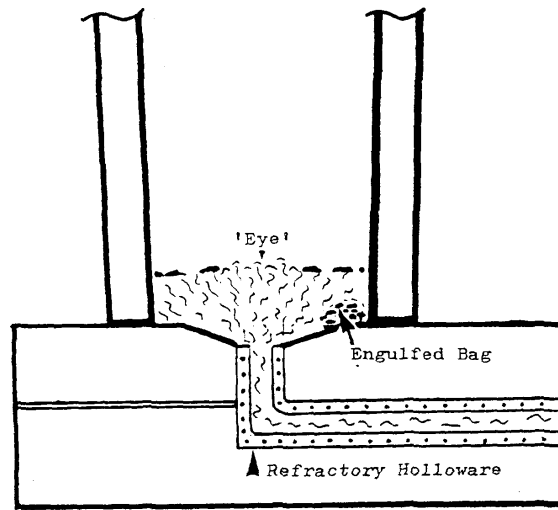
Schematic of bottom pouring showing entrapment of powder added to mold bottom in bag
